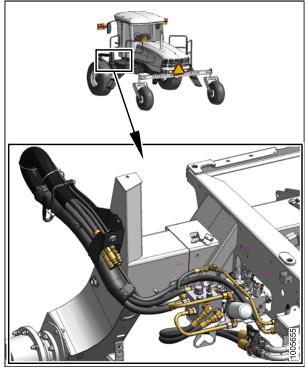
Auger Drive Basic Kit and Completion Kit Installed
